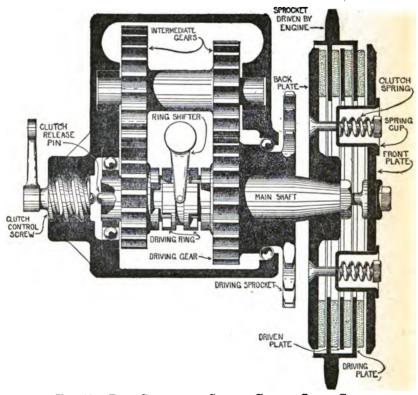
Disk Clutch and Sliding Change-Speed Gear
